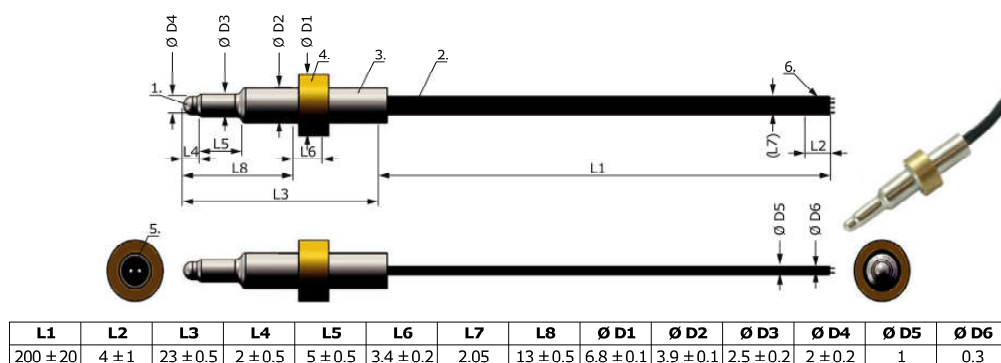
Thermistor NTC Vishay, dimensions in millimeters.
